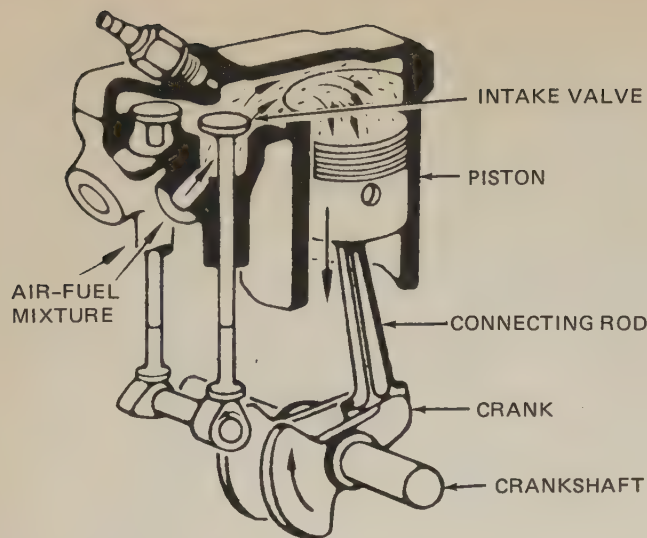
The intake stroke of a four-cycle engine. The intake valve has closed and the piston is moving down, drawing the air-fuel mixture into the cylinder as shown. (Clinton Engines Corporation)
